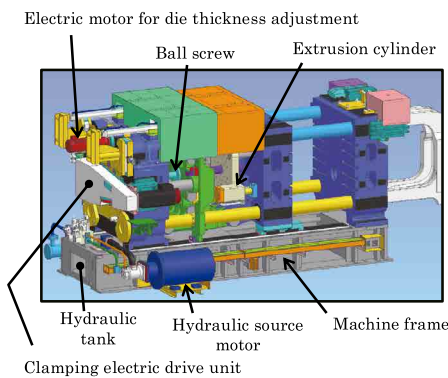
Outline Drawing of DC1100R-E Clamping Unit
